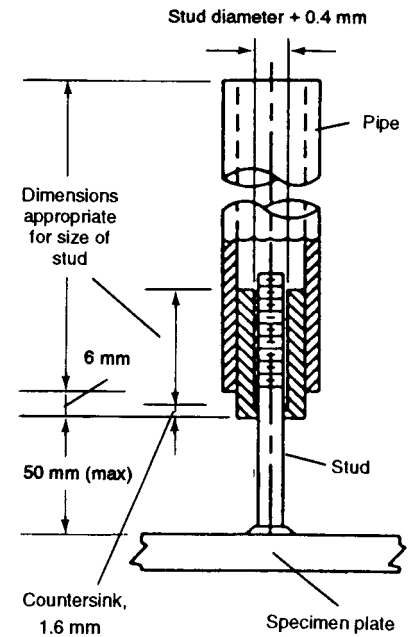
Typical bend testing setup. Studs that must undergo application qualification should be bend 90° without weld failure (15° for aluminum studs). Testing for preproduction or testing during production for inspection purposes requires bend testing to 30° from original position (15° for aluminum studs). For threaded studs, torque testing in accordance with Fig. 19 should be used. Source: Ref 2
